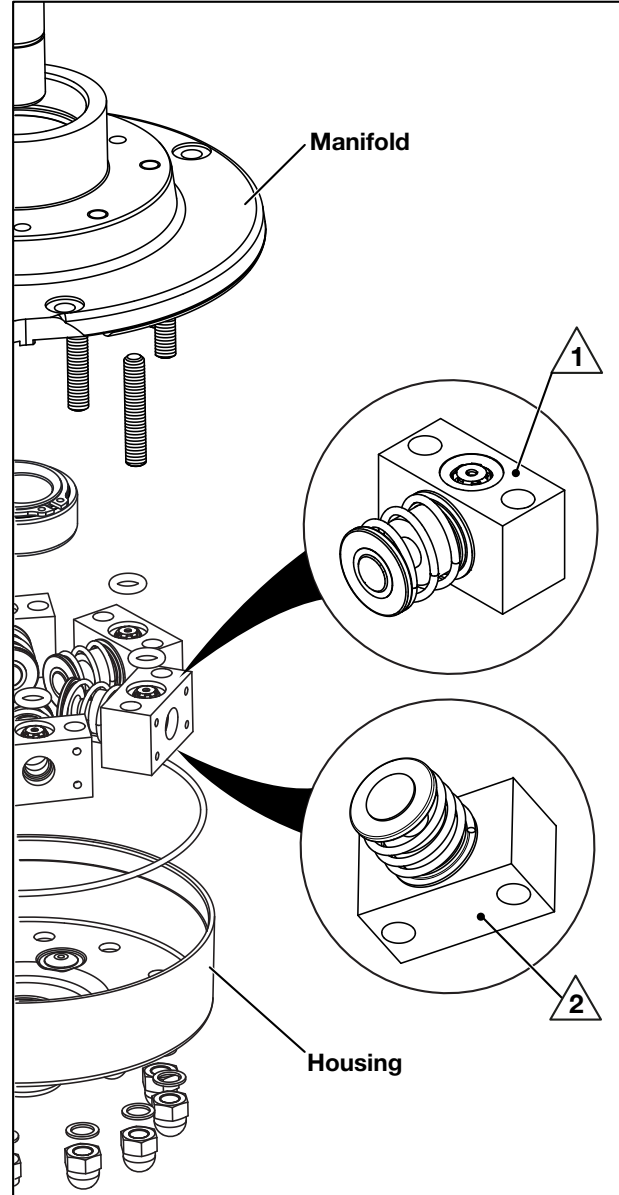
C - Piston Block Assembly Kits: DD7230900SR and DD7231900SR
